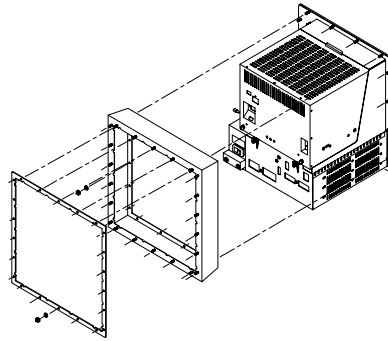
PanelMate Power Series 4000 Keypad Unit (Model 4500) Mounting Collar Assembly
